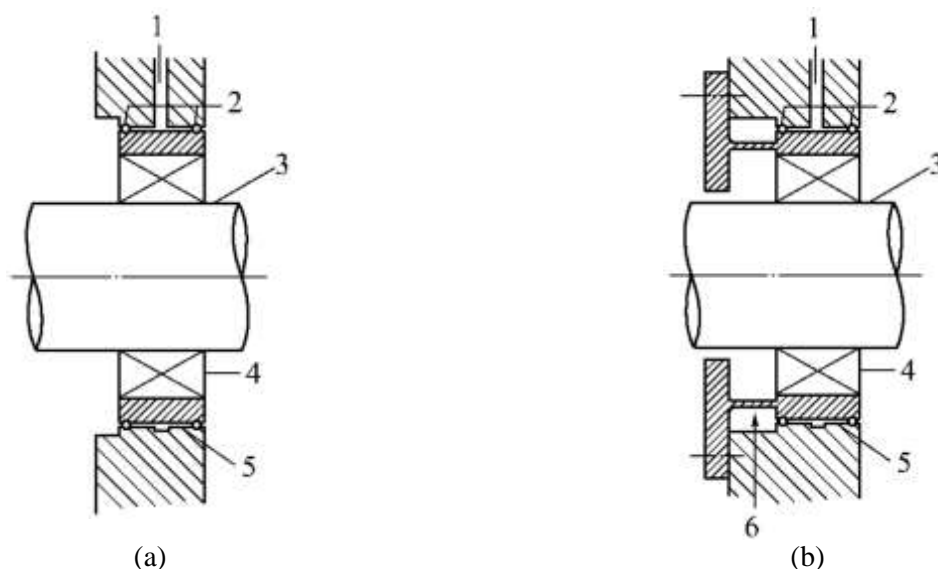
Two forms of squeeze film damper: (a) not concentric; (b) the concentric: 1-Lubricate 2-Seal 3-Shaft 4-Rolling bearing 5-Squeeze film 6-Centering spring
